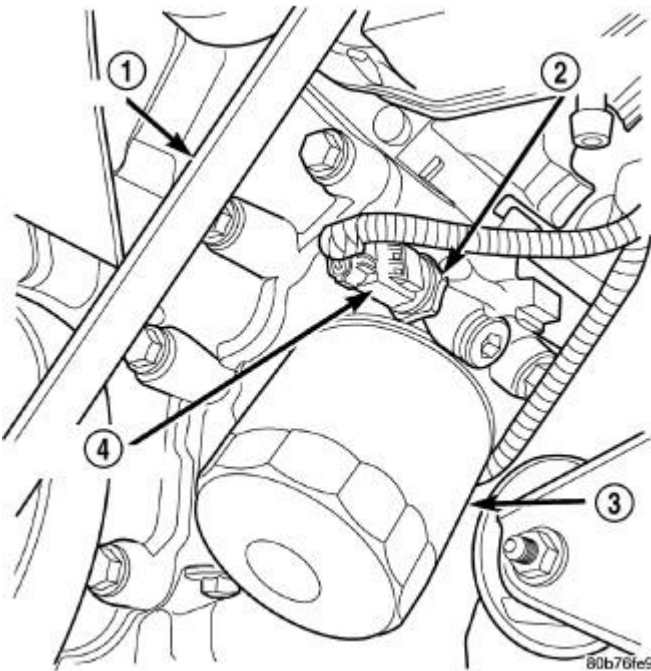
Belt, Oil Pressure Sensor, Oil Filter & Connector
